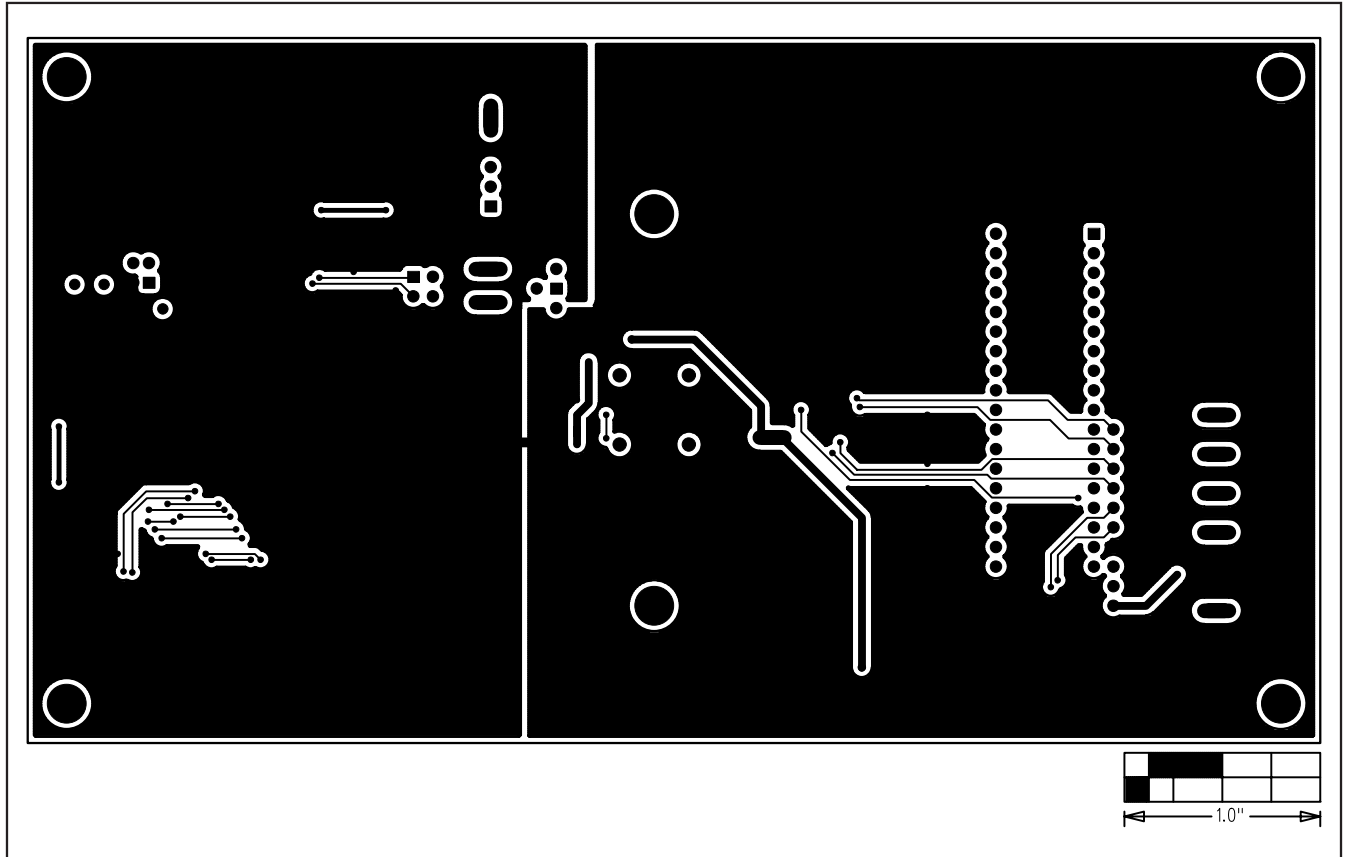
MAX9694 EV Kit PCB Layout—Solder Side
